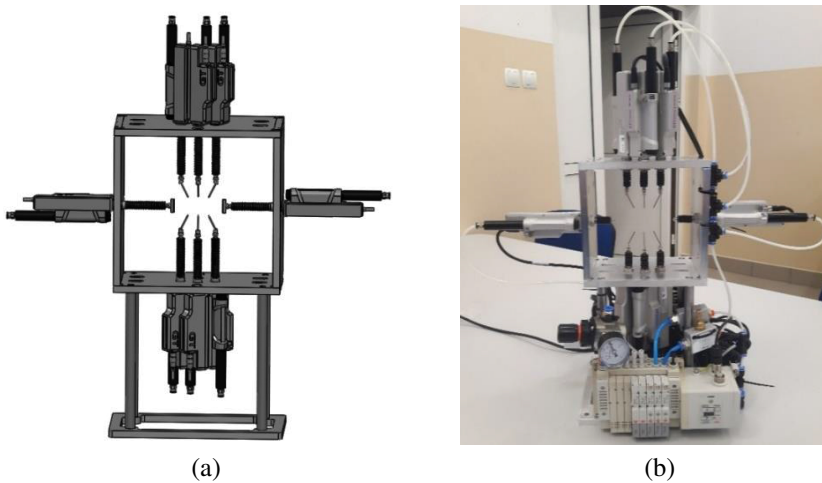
Measurement module CAD model (a), module prototype picture (b)
